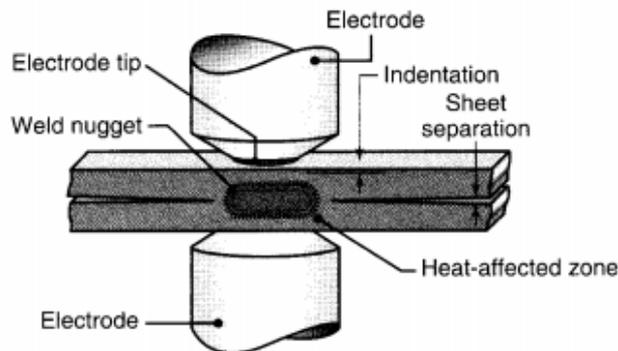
Cross section of a spot weld, showing the weld nugget and the indentation of the electrode on the sheet surfaces.
